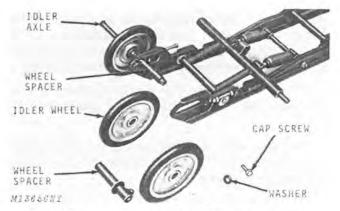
Removing Rear Idler Axle, Wheels and Spacers
